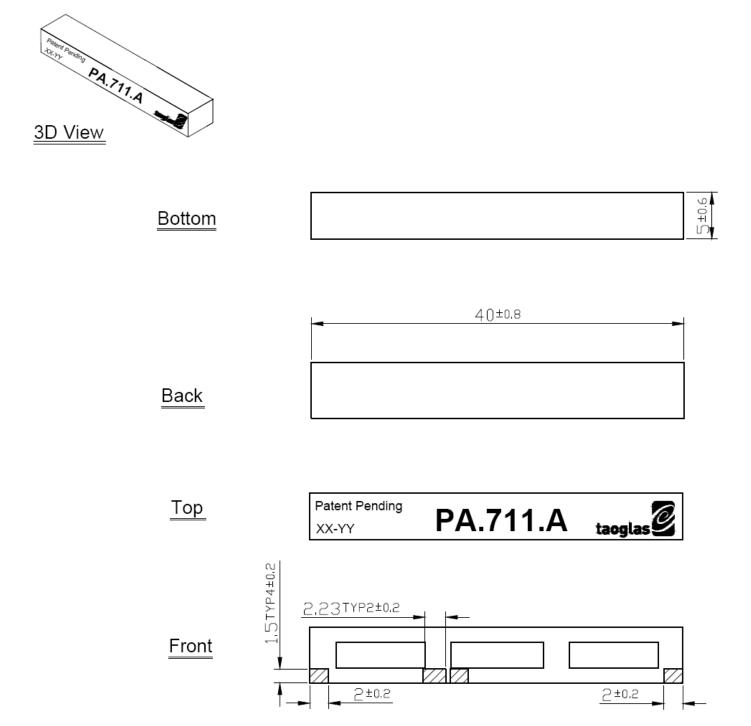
Mechanical Drawing of the PA.711.A Antenna
